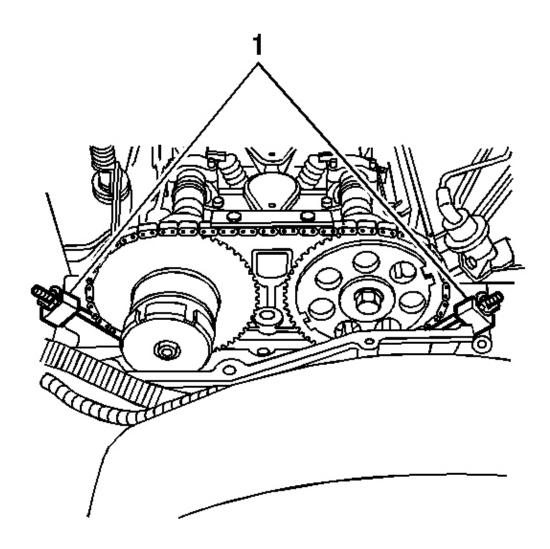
View Of J 44217 & EN-44217-45 At Timing Chains Courtesy of GENERAL MOTORS CORP.
